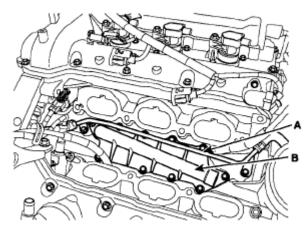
Identifying Oil Filter Body Courtesy of HYUNDAI MOTOR CO.
